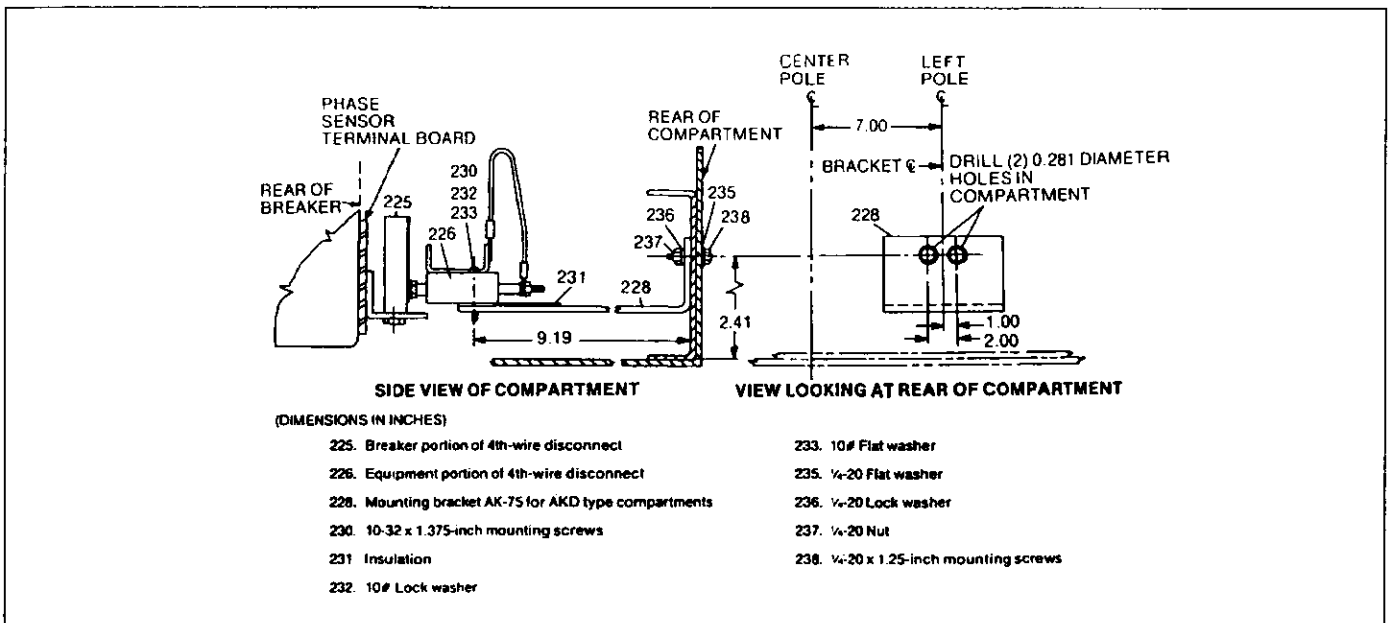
4th Wire Disconnect-Type AKD-6 Equipment
